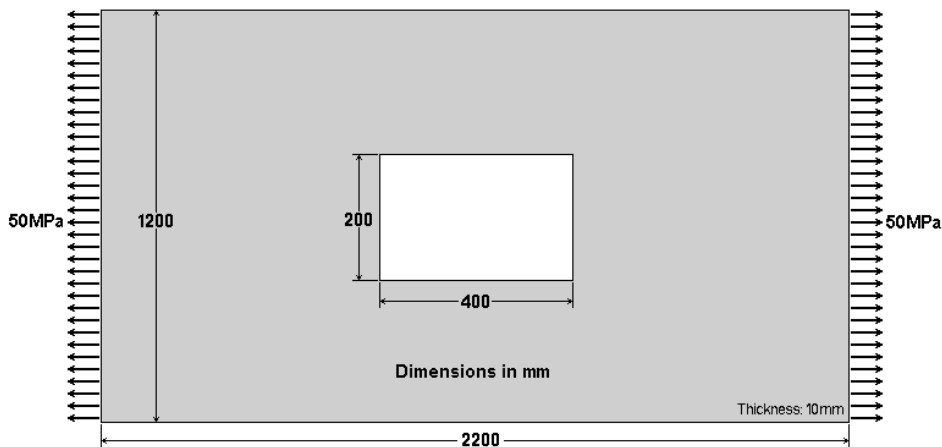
Example of an inspection window cutout subject to pure tension loading
